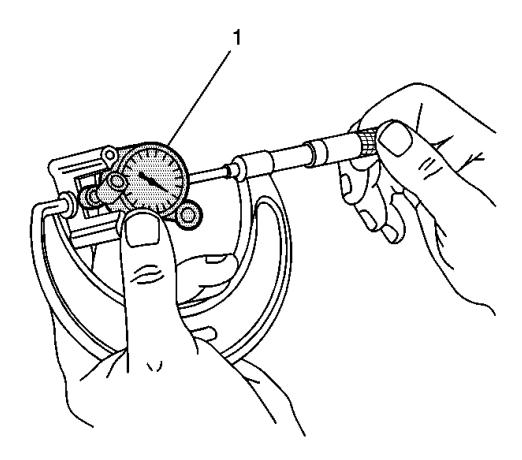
Measuring Bore Gauge Courtesy of GENERAL MOTORS COMPANY
